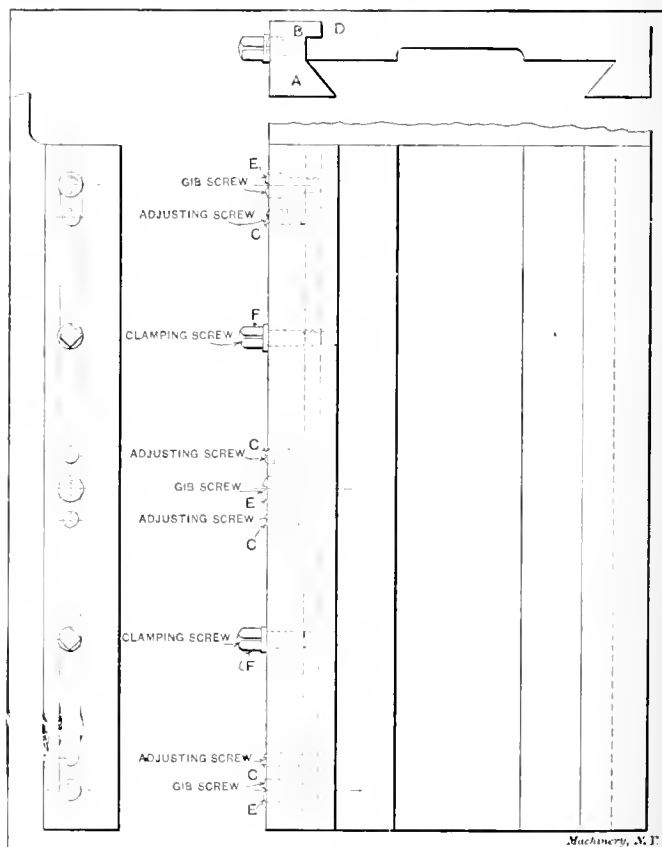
Construction of Gib for Milling Machine Knee Slide
